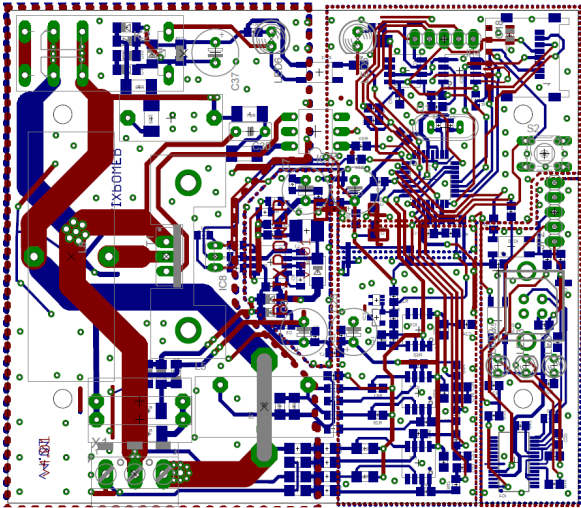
Reductors PCB design. Power traces has to be as short as possible.
